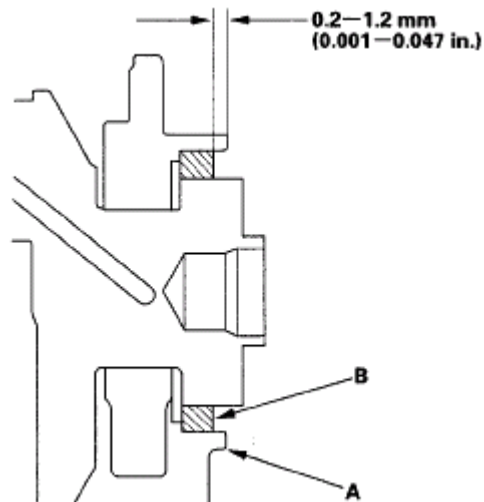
Measuring Distance Between Engine Block & Crankshaft Oil Seal
